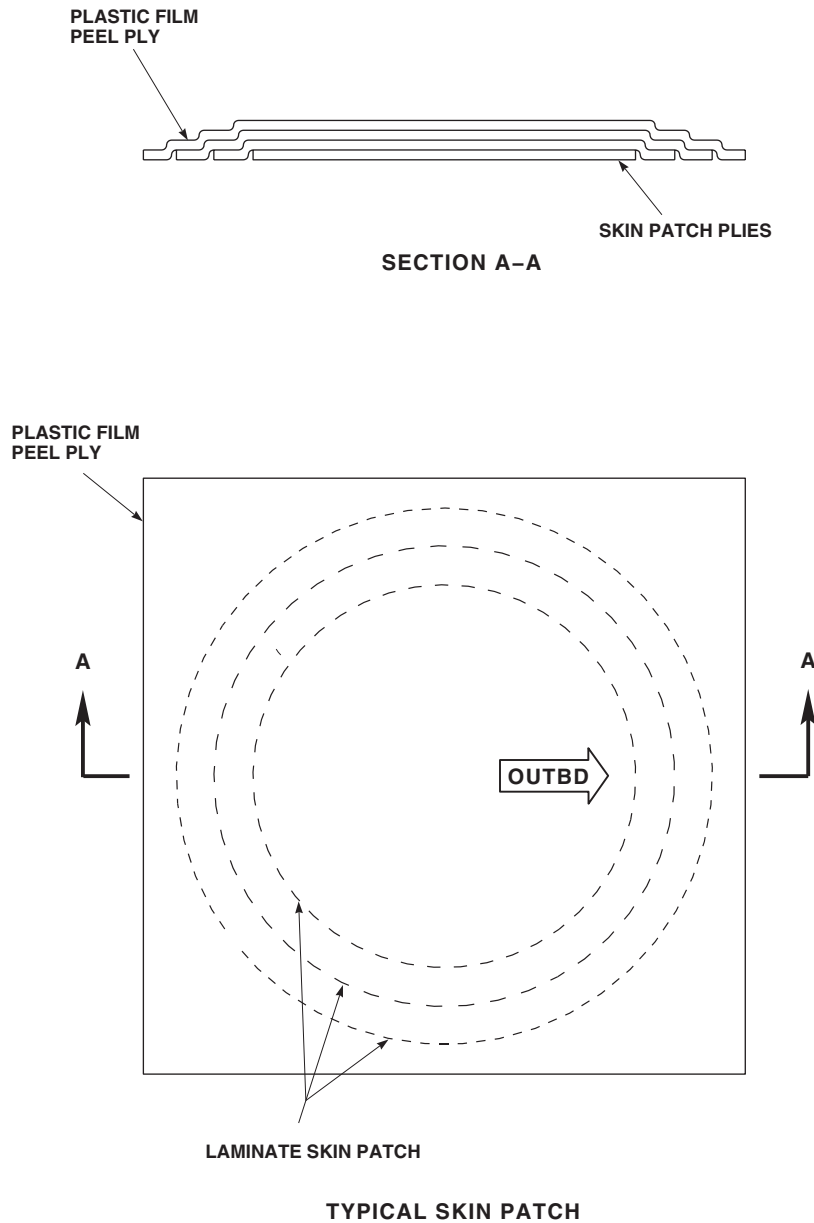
SKIN PATCH REPAIR (SHEET 1 OF 3)
